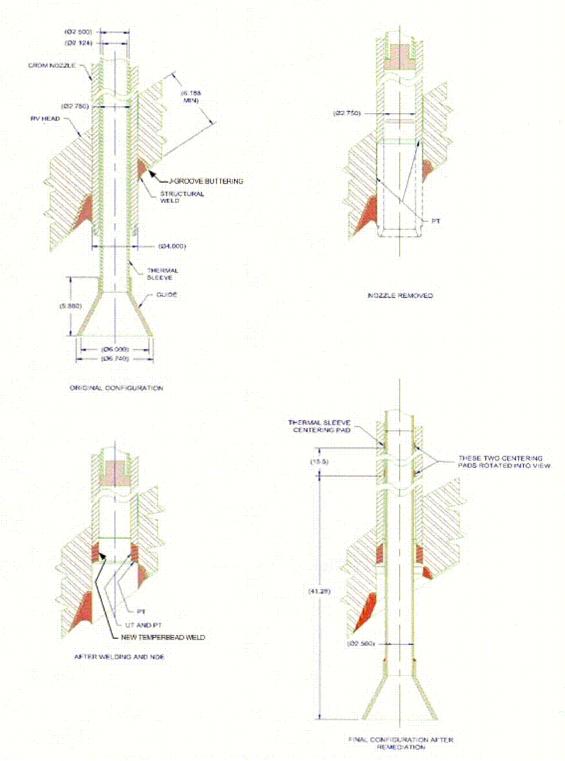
, RVCH Control Rod Drive Penetration Nozzle Weld Original Configuration and Repair Details
